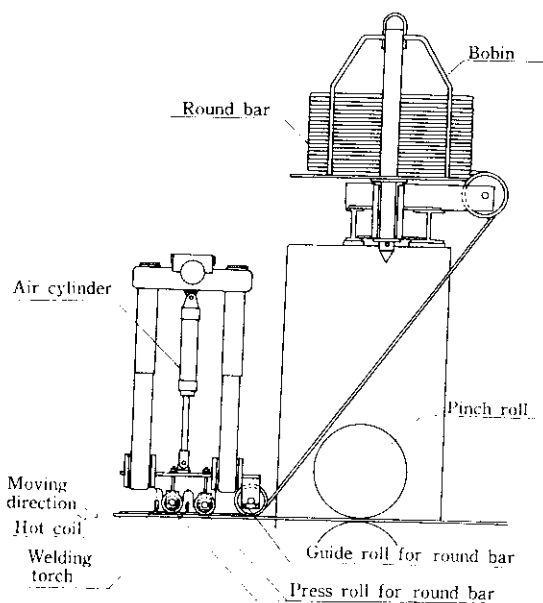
Manufacturing process of "Spiral ribbed pipe"
